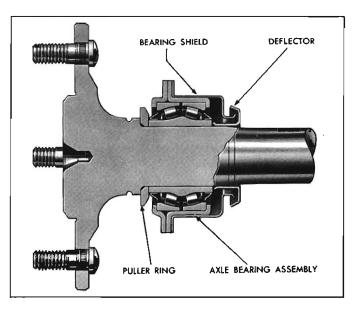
C-6-Corvair 95 Axle Shaft and Bearing
